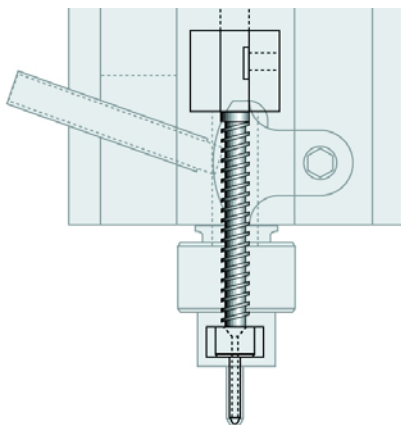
The valve can be indexed to dispense material according to encoder counts.
